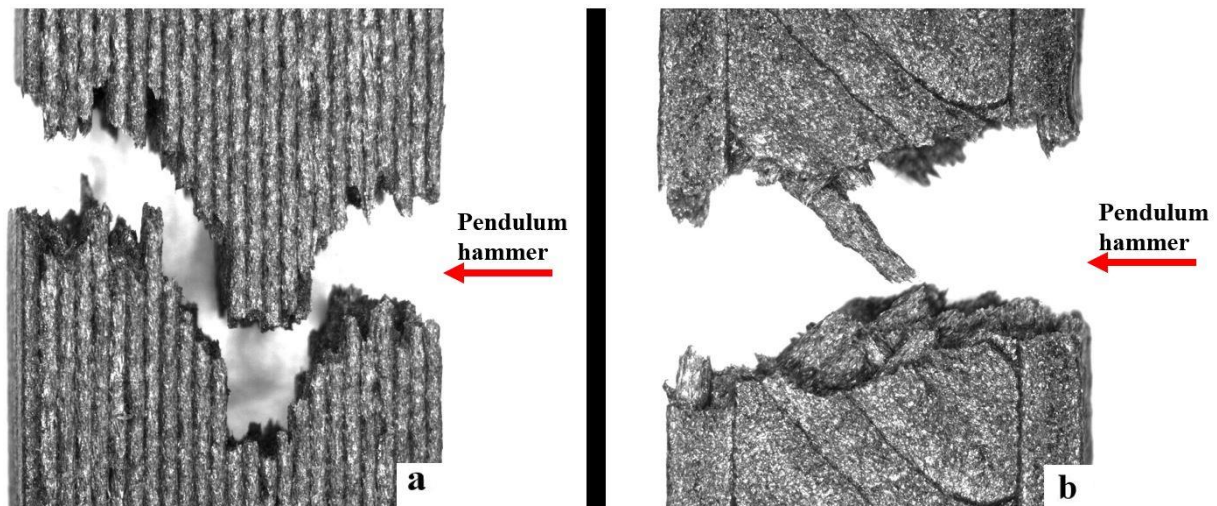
Typical fractures of impact specimens: a) Crack arrest, b) Crack divider.
